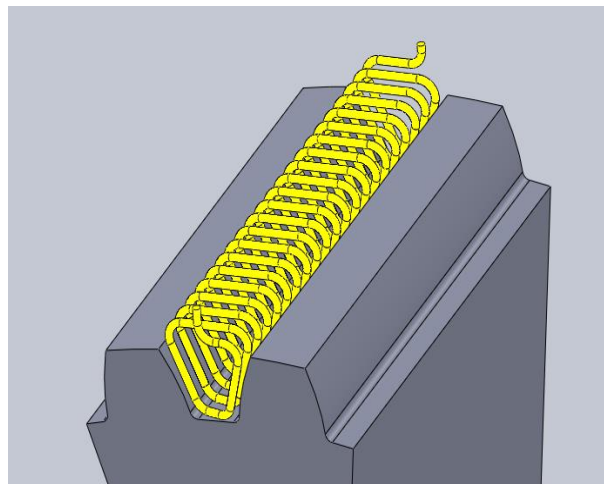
Inductor with a perpendicular arrangement of the wire
